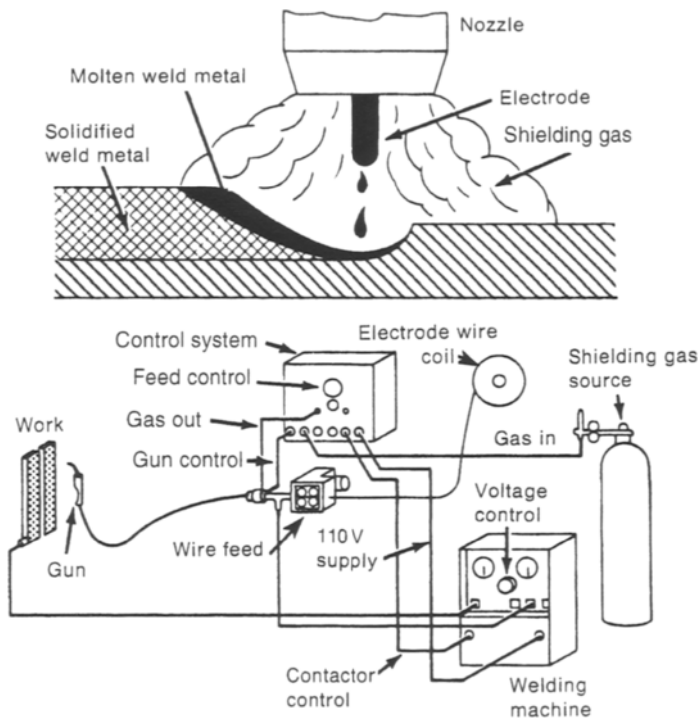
Equipment arrangement for inert gas arc welding. (Reproduced with permission of Nickel Development Institute publication 9002; *Welding of Stainless Steel and Other Joining Methods*.)
